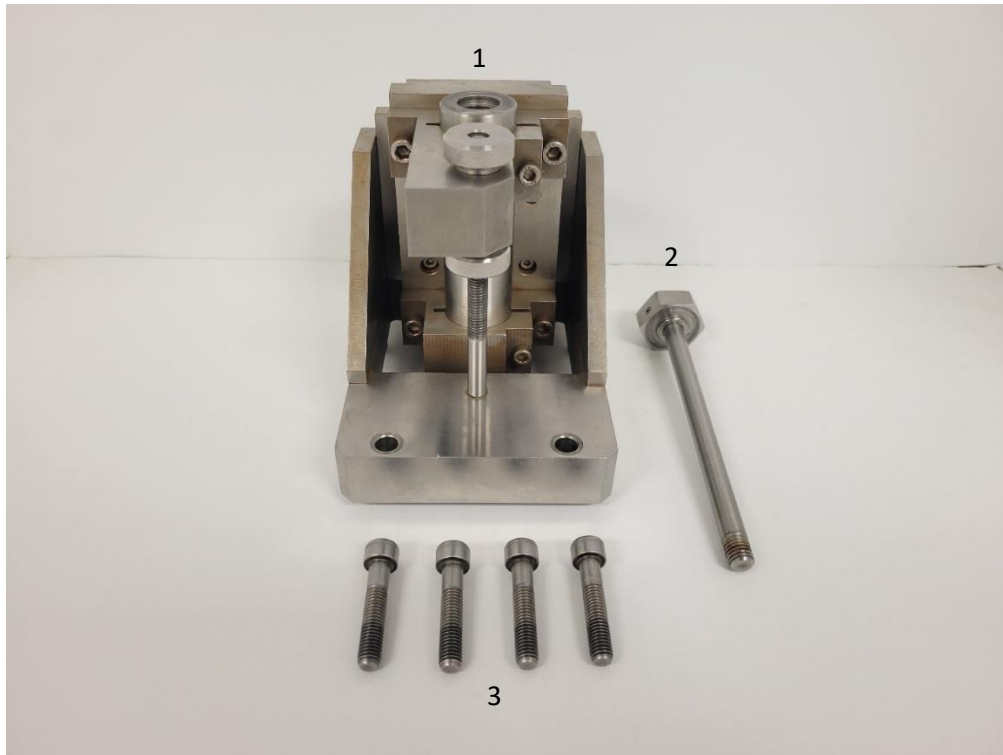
1) Vertical bearing assembly, 2) top cap spindle, 3) 4 screws.
